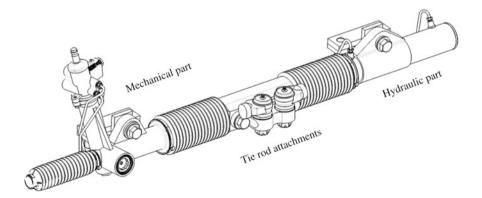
Hydraulic rack-and-pinion steering with end tap
